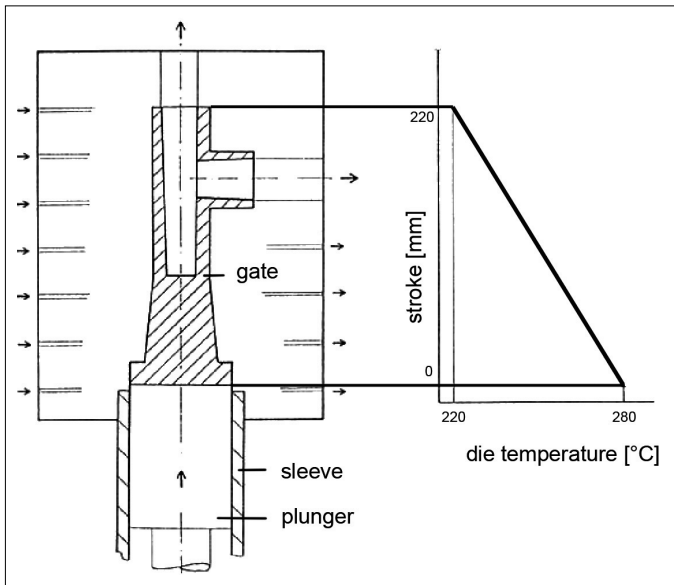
Thermal gradient for casting of a steering housing on an HVSC machine according to [Kau95c].
